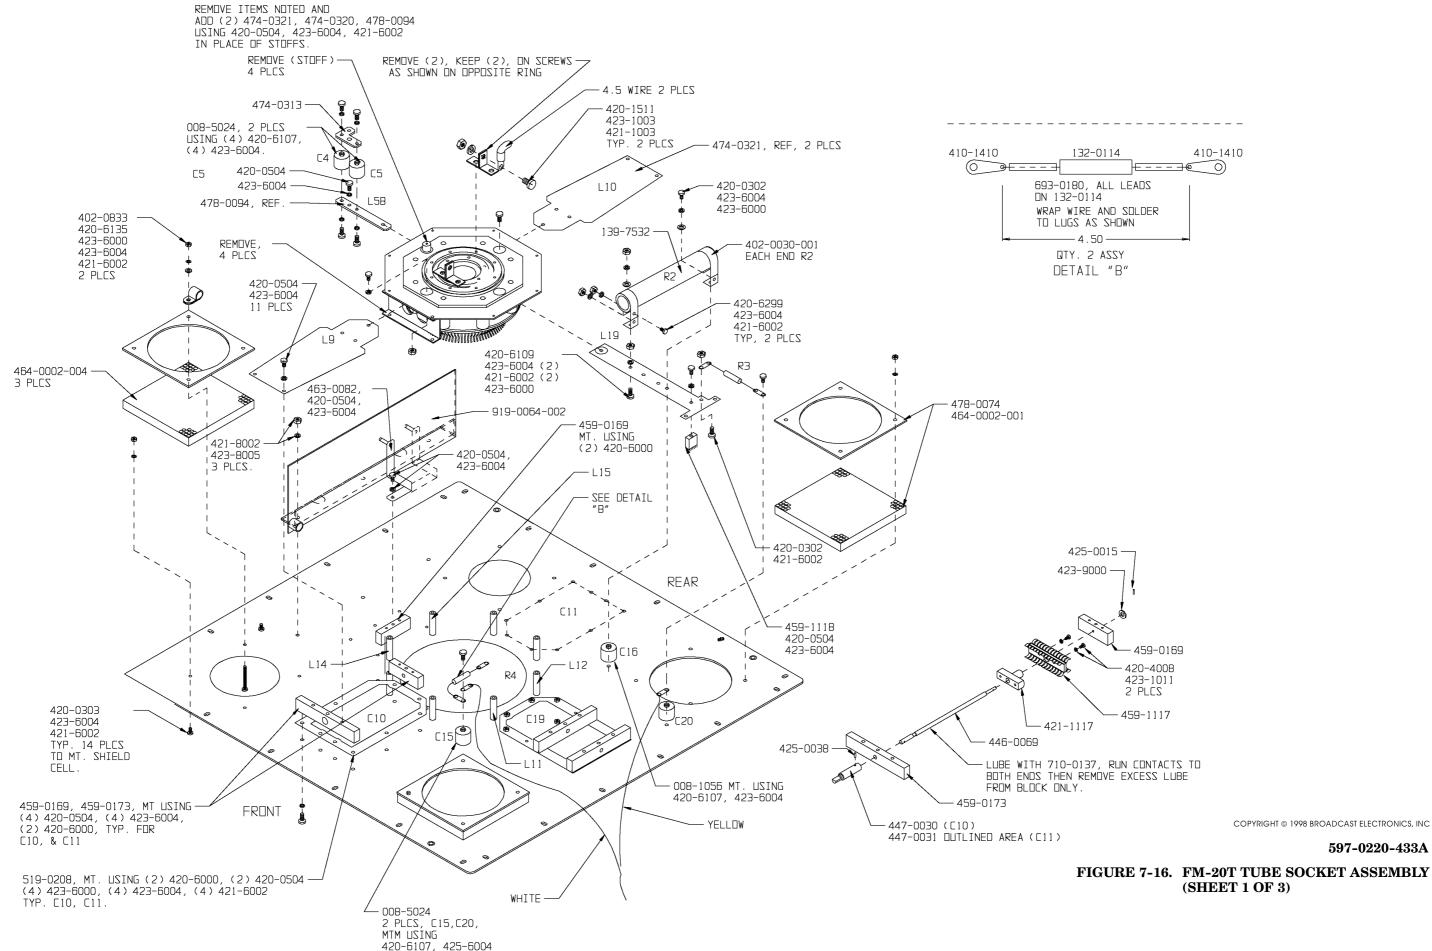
FM-20T TUBE SOCKET ASSEMBLY (SHEET 1 OF 3)
